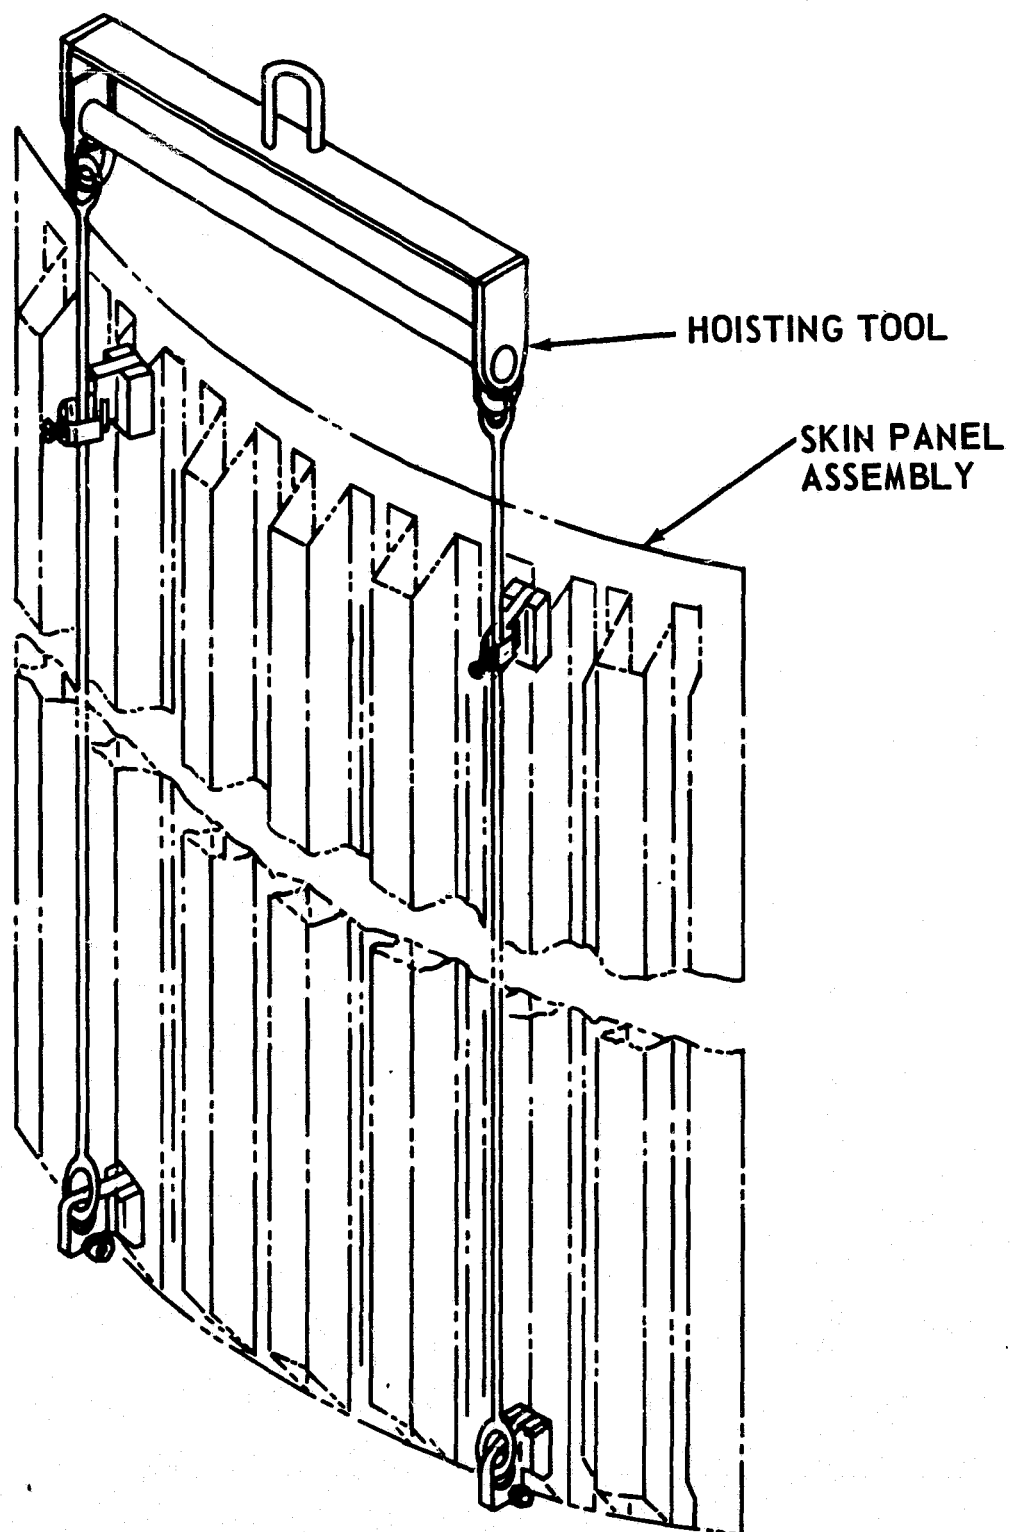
AFT SKIRT SKIN PANEL SUBASSEMBLY HOISTING TOOL
